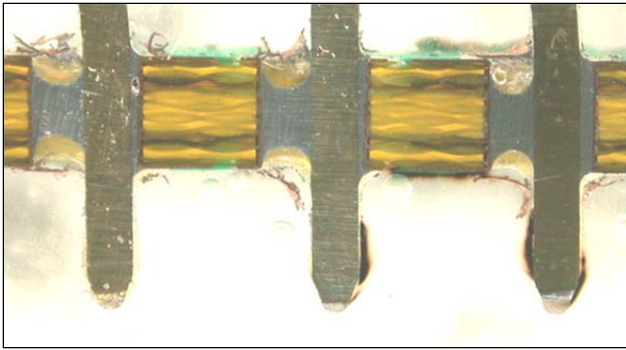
This cross-section of a pin-in-paste assembled PCB shows solder starvation in the solder joint and an excess of flux.
